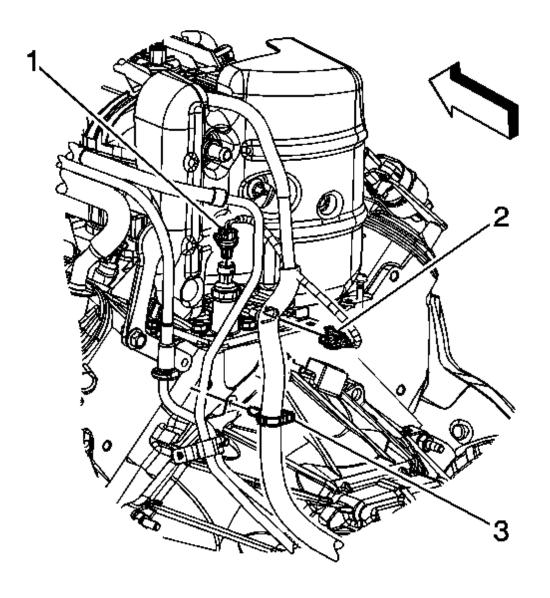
View Of Engine Harness Electrical Connectors & Inlet Hose Clamp Courtesy of GENERAL MOTORS CORP.
